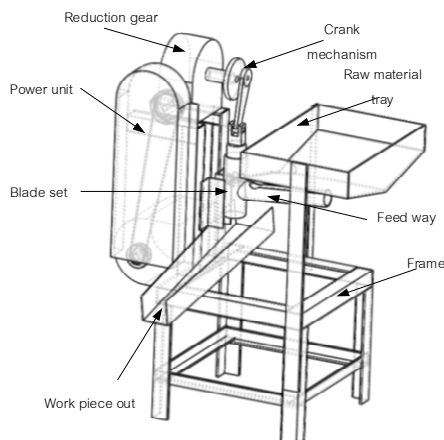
Design of Indian gooseberry tapping machine with crank mechanism.
